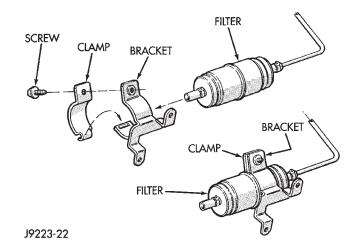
Fuel Filter Bracket Clamp Removal/Installation
